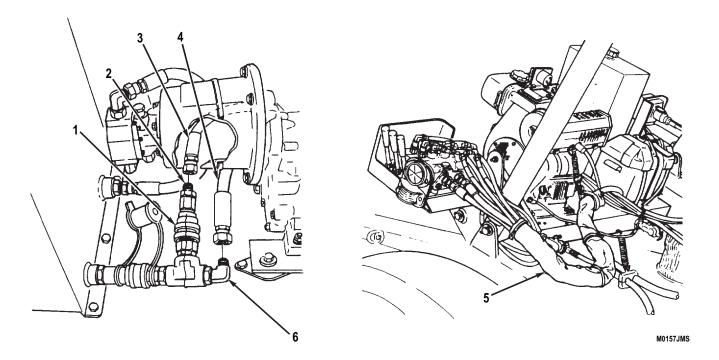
Hydraulic Control Valve Outlet-to-Hydraulic Reservoir Inlet Hose Assemblies Removal.
